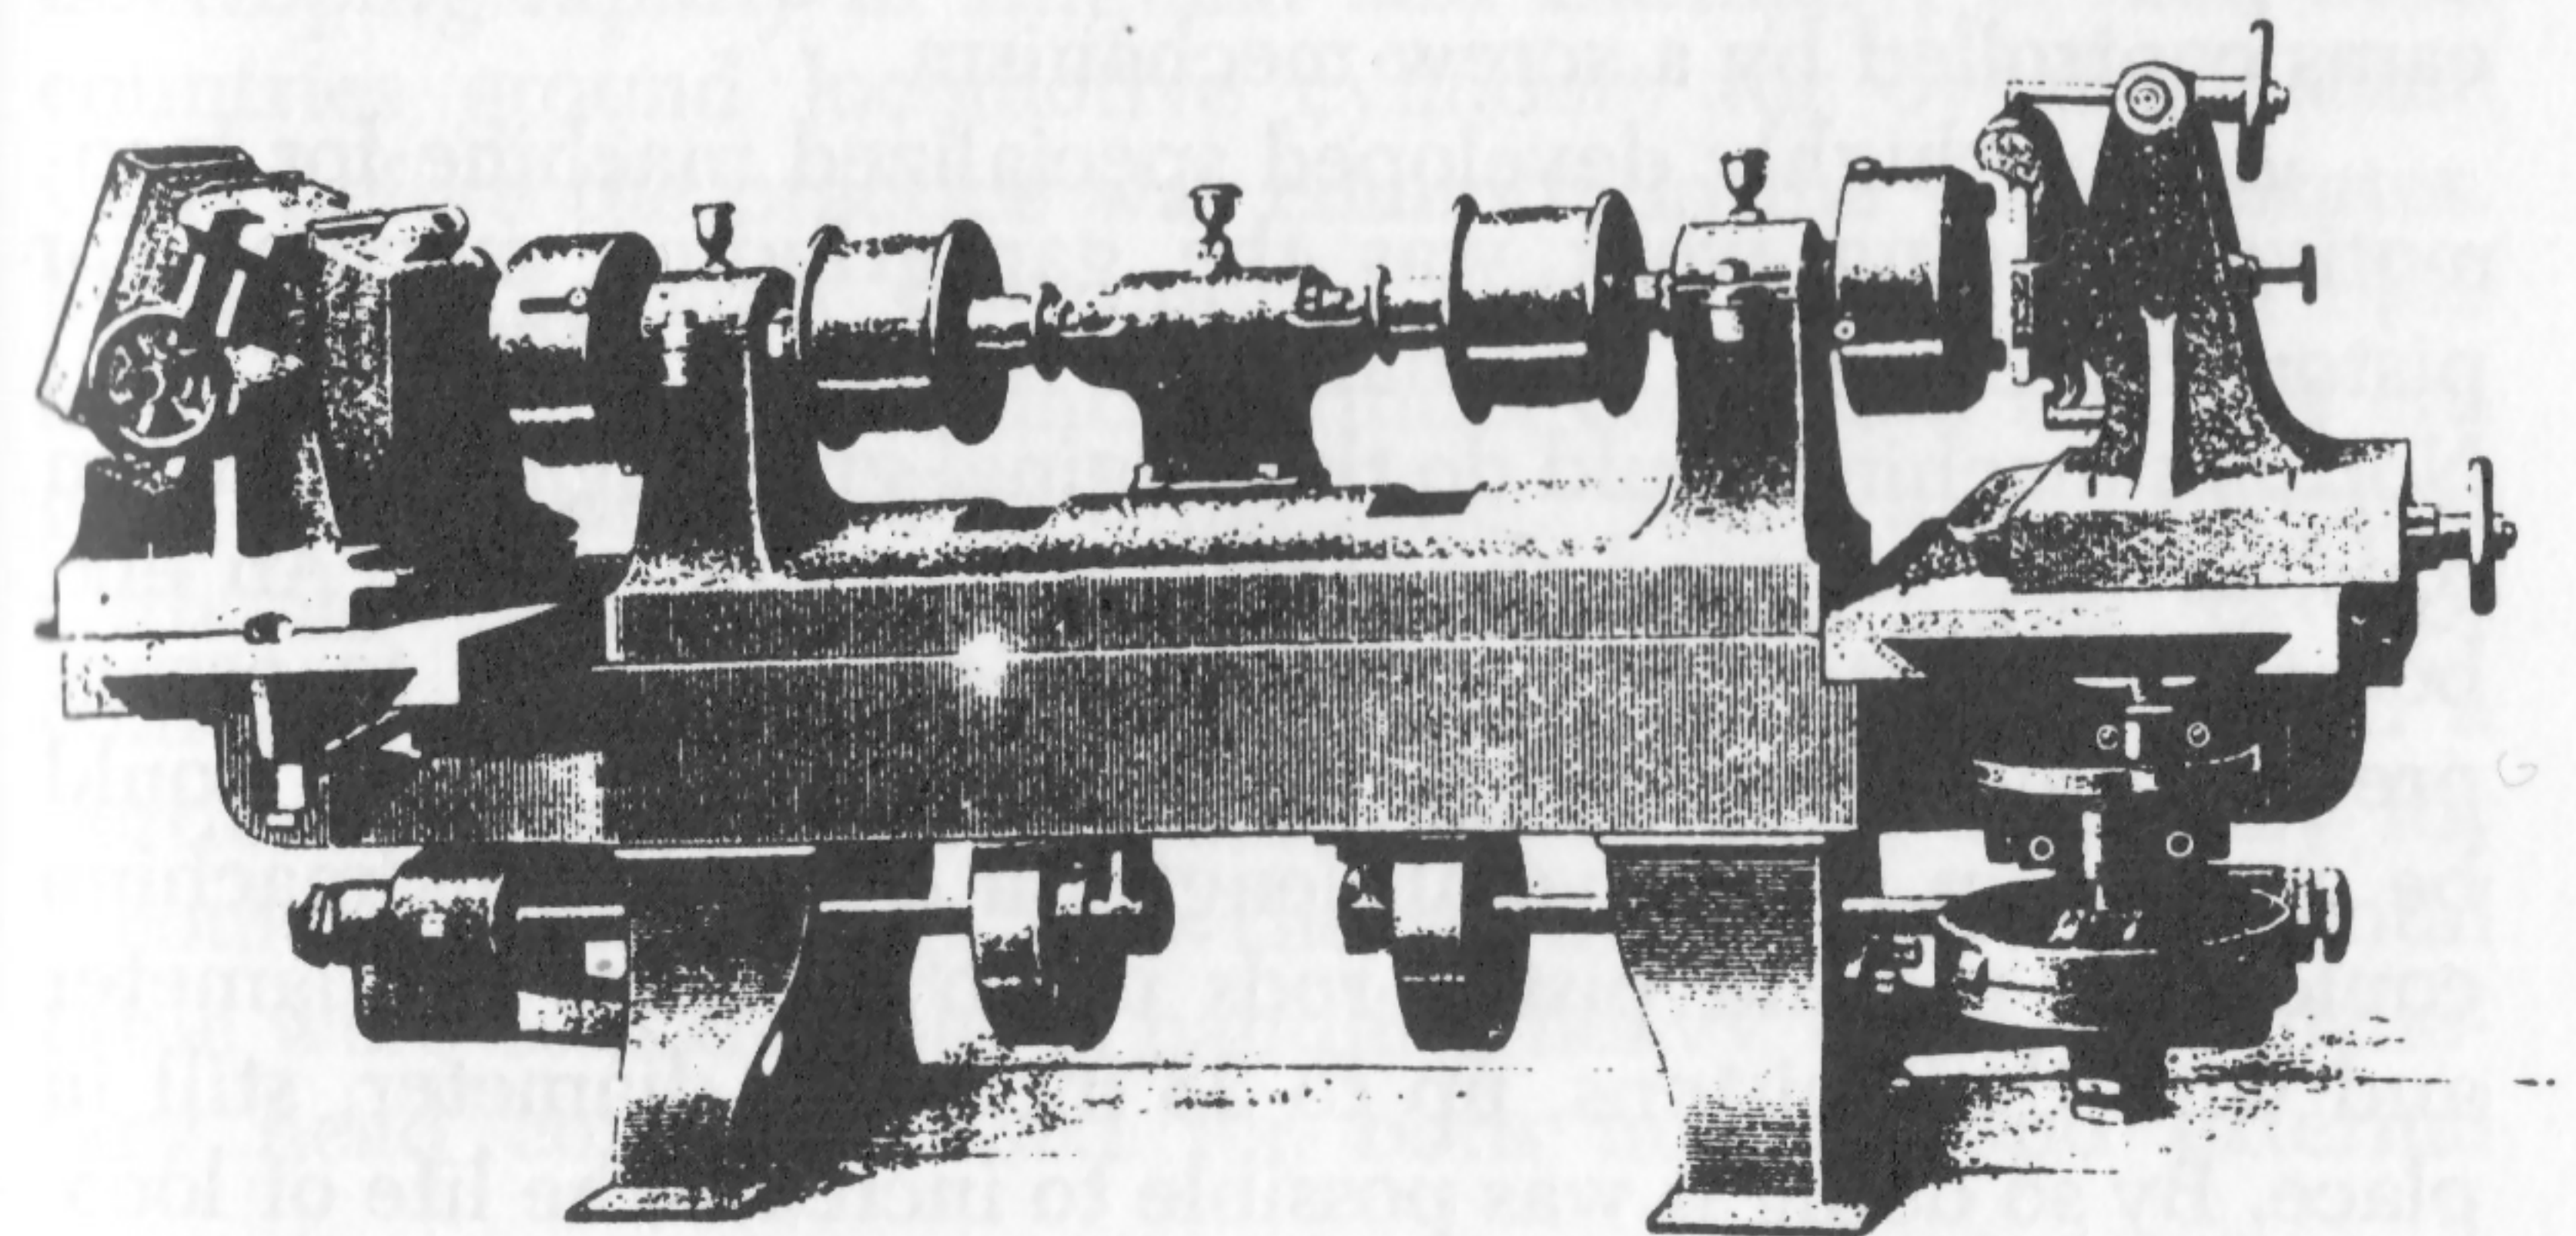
SPRINGFIELD JOURNAL BEARING GRINDER, 1891
